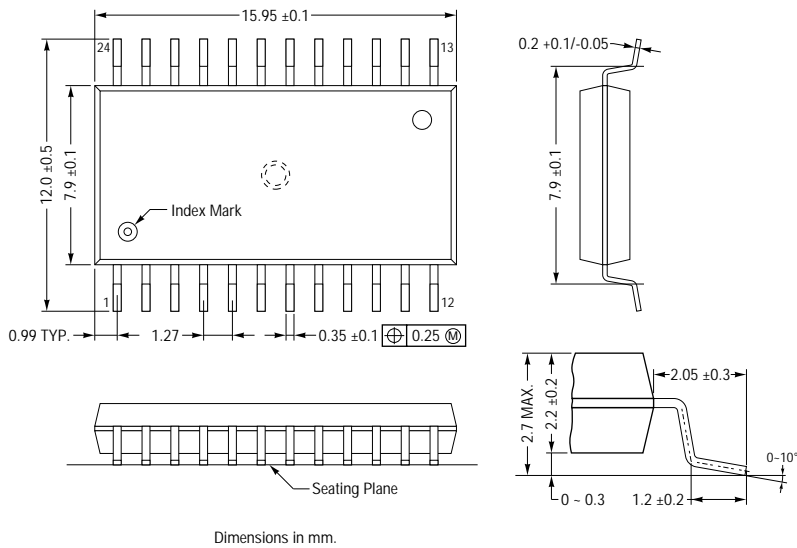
MSM66P54 Mechanical Drawing (SOP24-P-430-2K Package)
